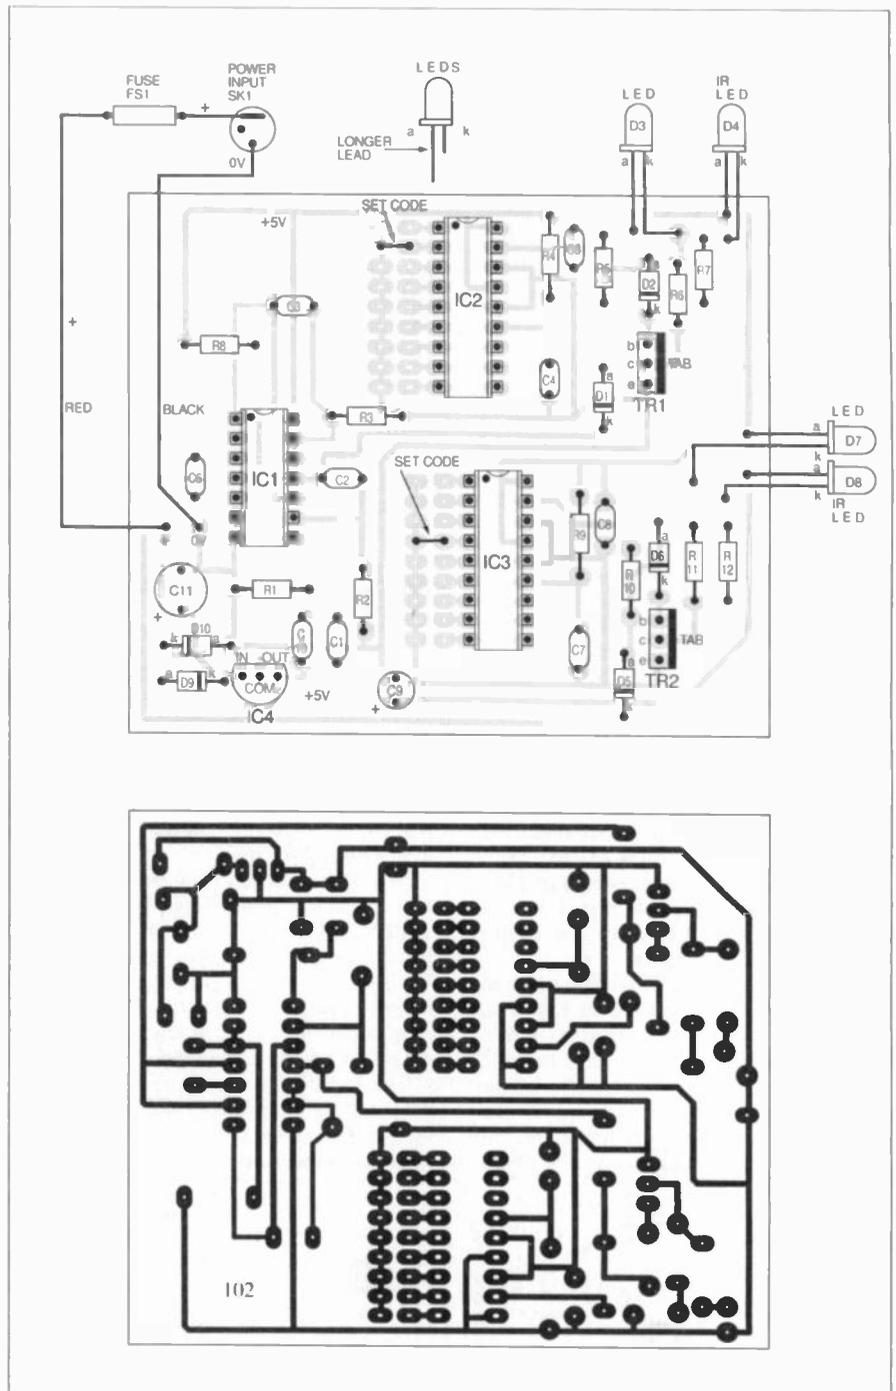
Transmitter printed circuit board component layout and full-size underside copper foil master track pattern.
